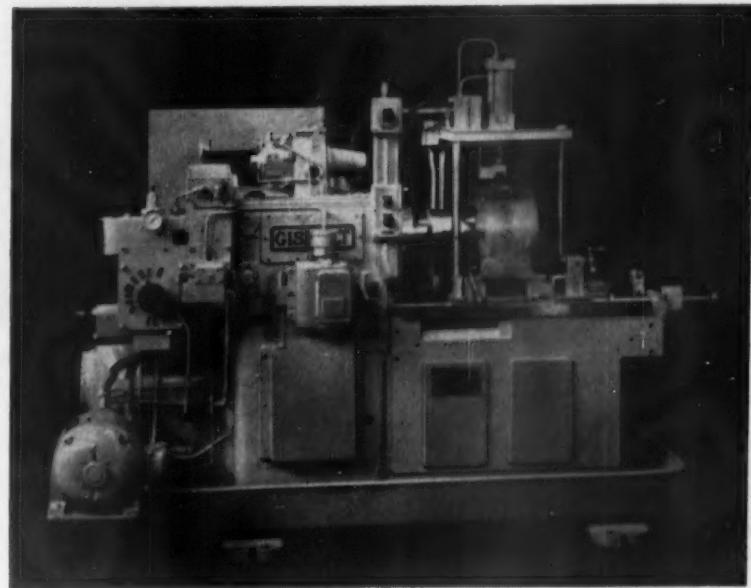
Gisholt No. 12 hydraulic automatic lathe equipped for the first operation on electric motor frames
